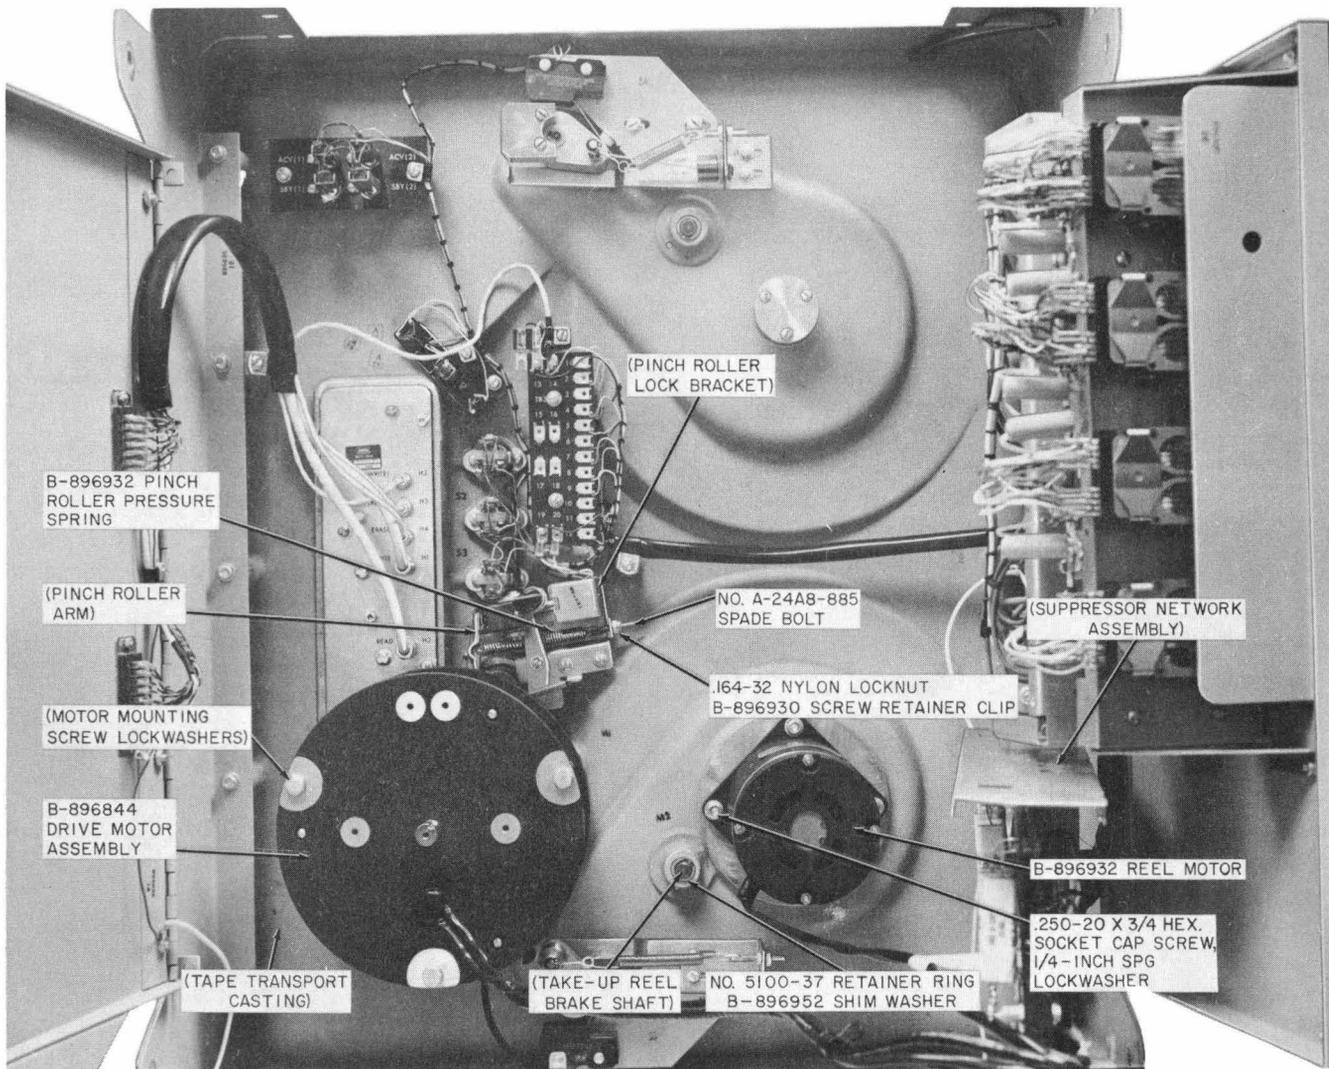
KS-19125, List 1 Recorder Assembly — Rear View of Tape Transport
